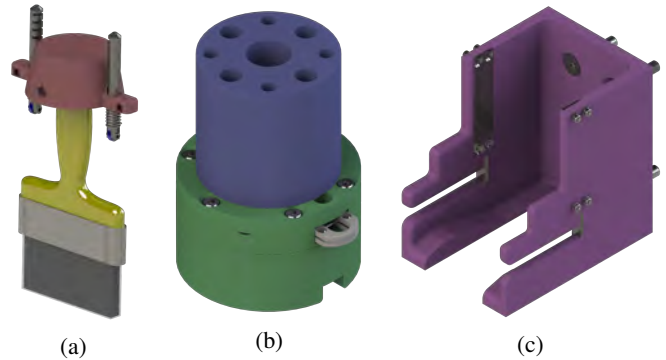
Three tool changer components. (a) The modular base component is based on truncated male cone with two flanges on its sides and a pair of spring-compressed dowel pins. (b) The robot component is the female truncated cone that connects the the tool component. The top (blue) part is an adapter for the Fetch robot which was used to evaluate the tool changer. (c) The tool housing serves as storage for each tool and provides the structural constraint to allow passive connection of the tool changer.
